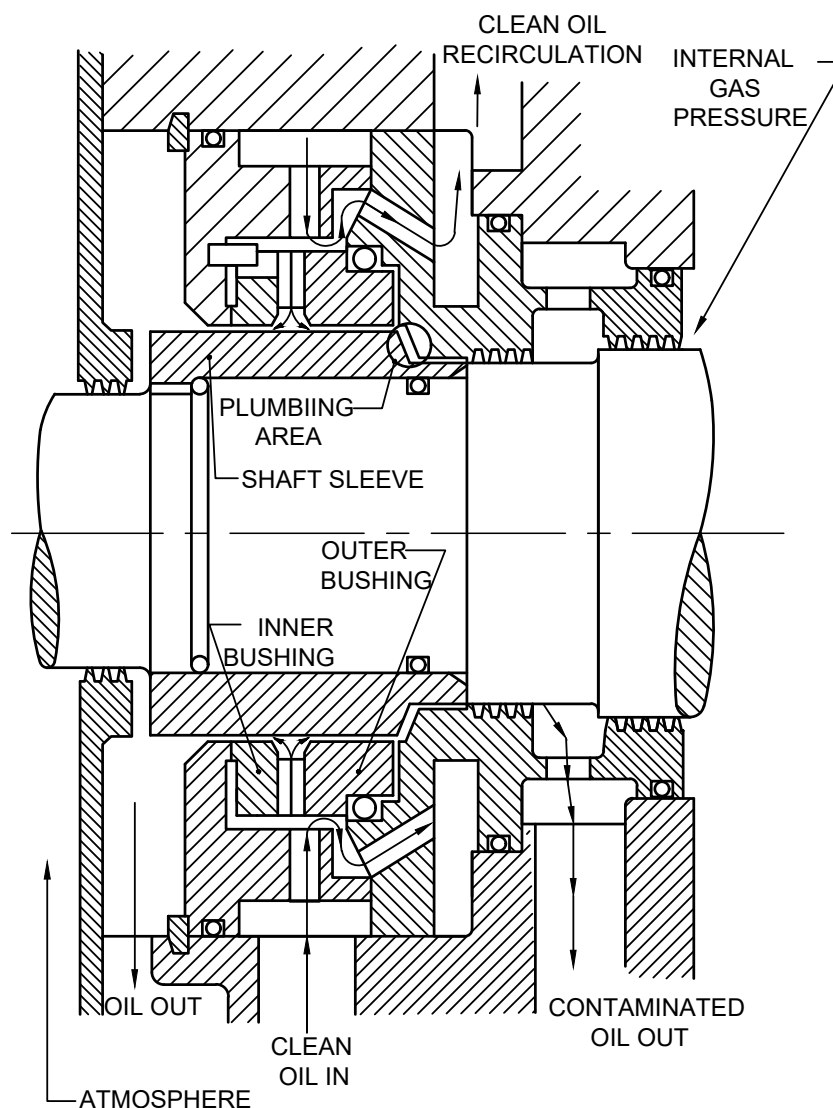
LIQUID - FILM SHAFT SEAL WITH PUMPING BUSHING
